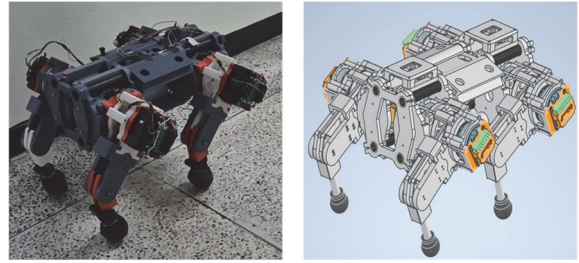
Prototype and 3D CAD model of the quadruped robot
